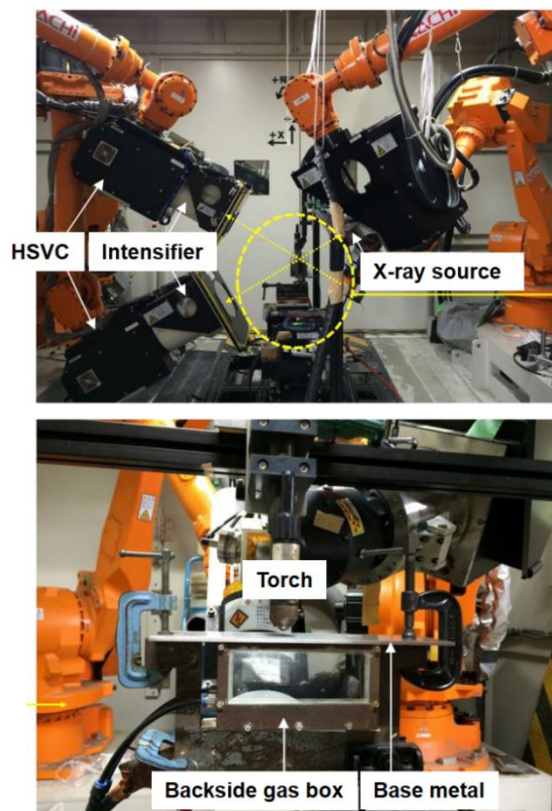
The photographs of the welding equipment and X-ray transmission system [35]
